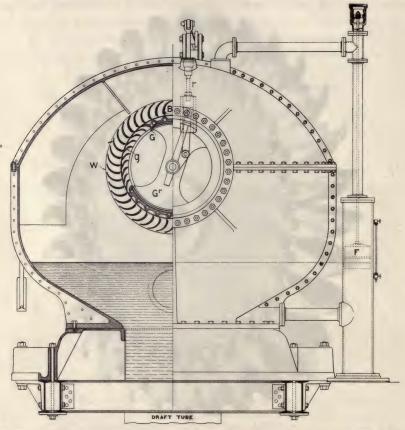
End Section and Elevation Girard Impulse Turbine With Draft Tube. Platt Iron Works Company (see page 235).
